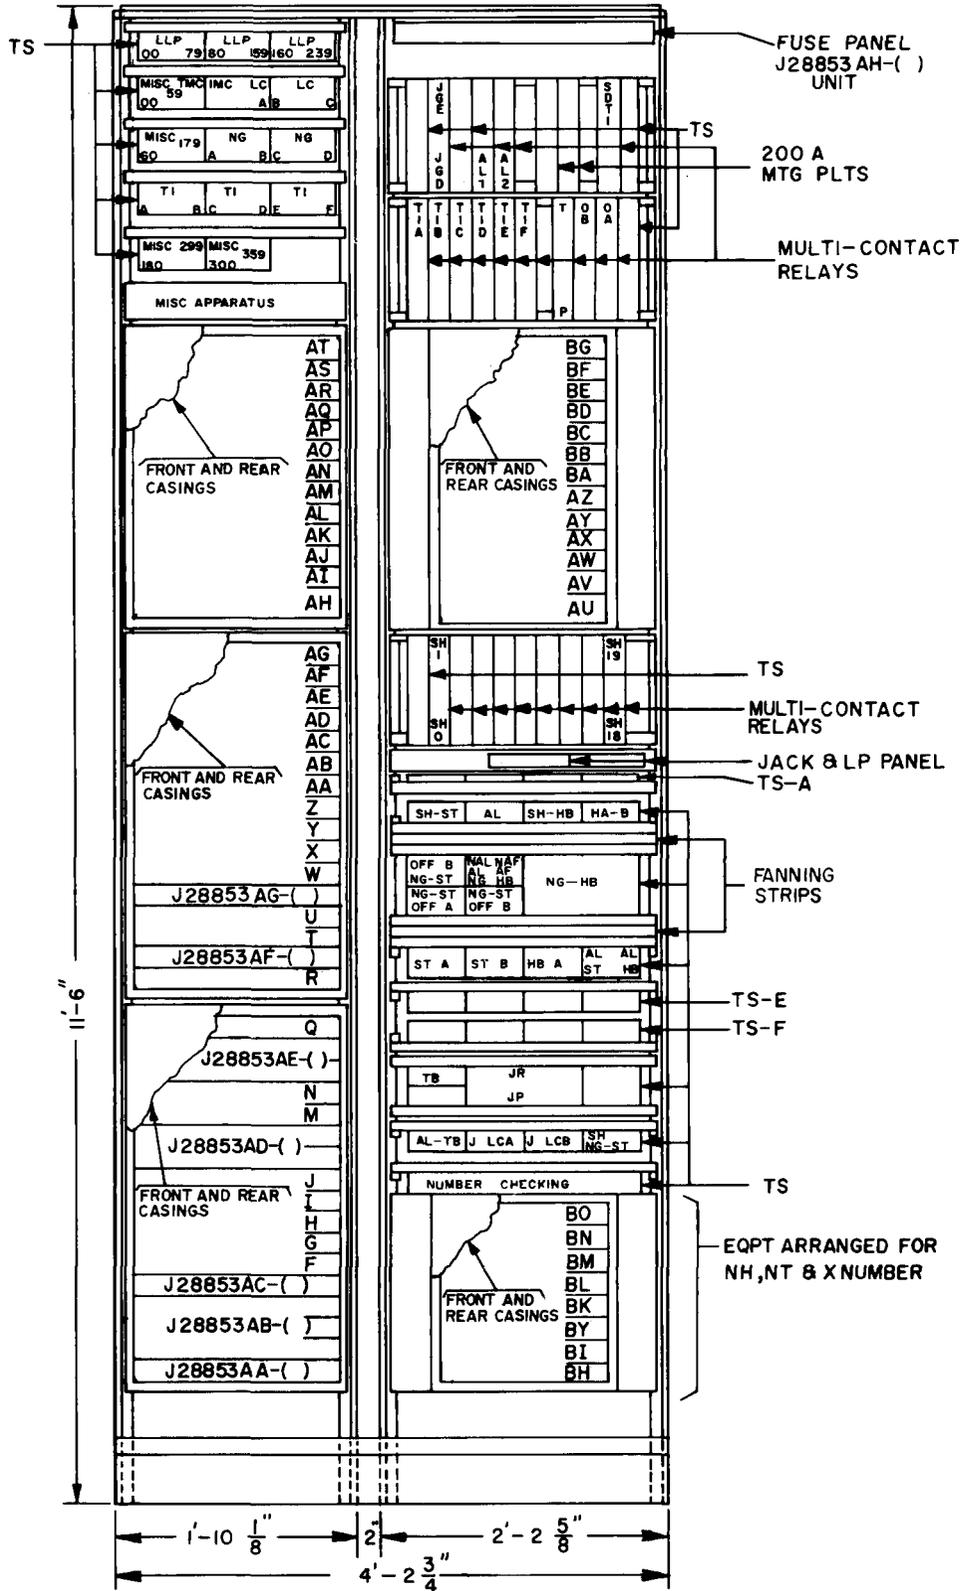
Terminating Marker Frame — Equipment Diagram — Cross-connection Field Stamped to Show Two 10,000 Number Series
